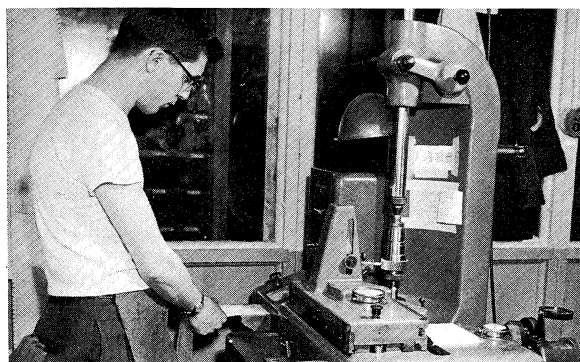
Charting gear involute profile accuracy on an involute checker. *Courtesy Warner Gear Div.
